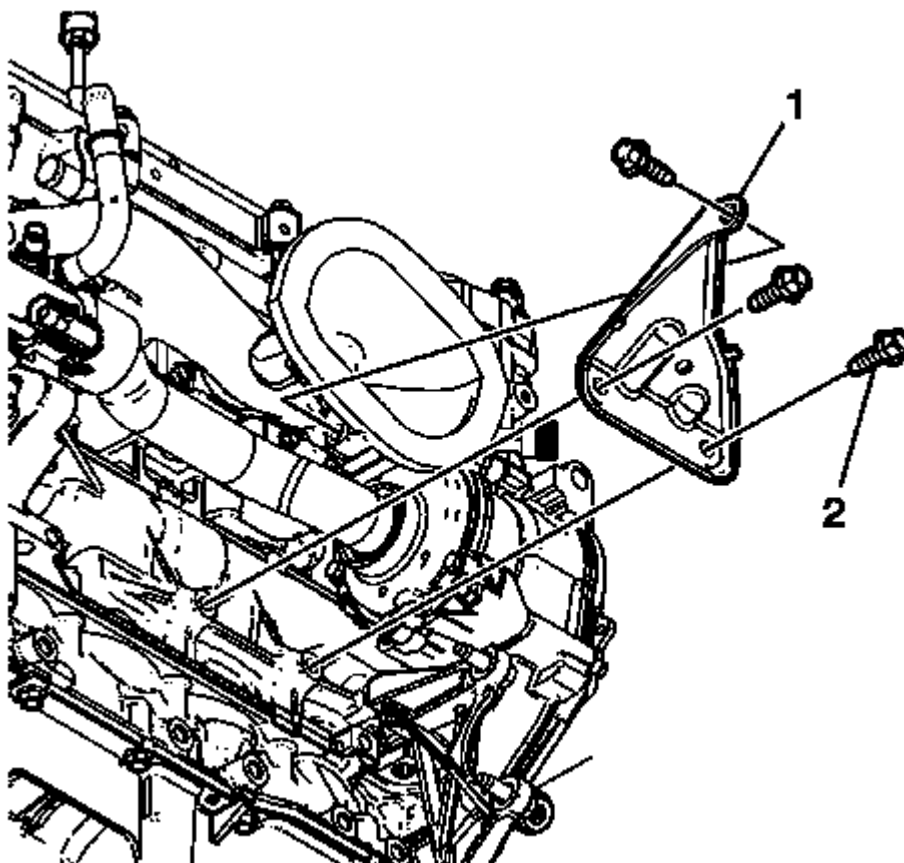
View of Exhaust Manifold Brace Bolts and Brace
